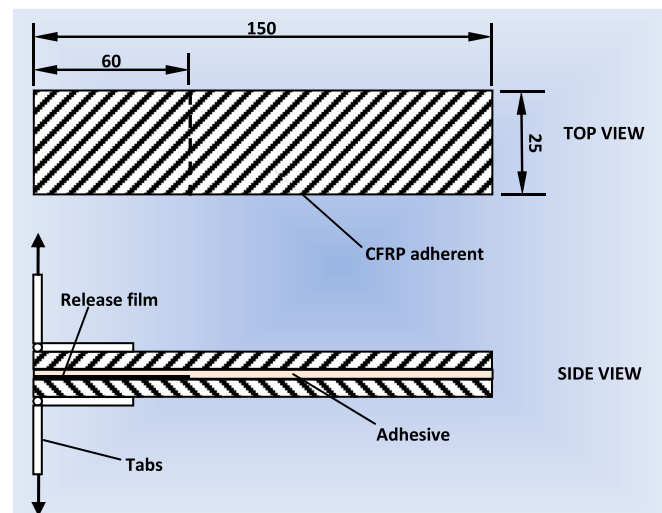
Schematic representation and dimensions of the DCB specimen.
